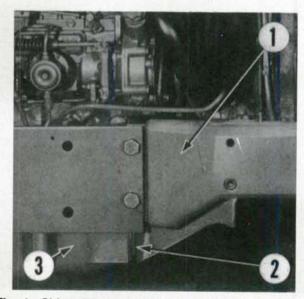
Shims (2) are used to correctly align front axle support (1) with engine and oil pan (3).
